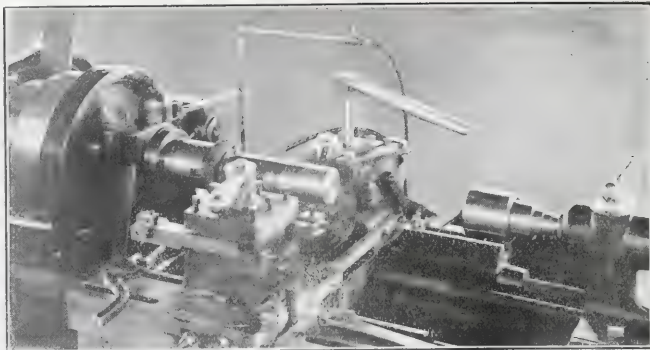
CUTTING GROOVE AND FINISHING BASE ON SPECIALLY EQUIPPED ENGINE LATHE
